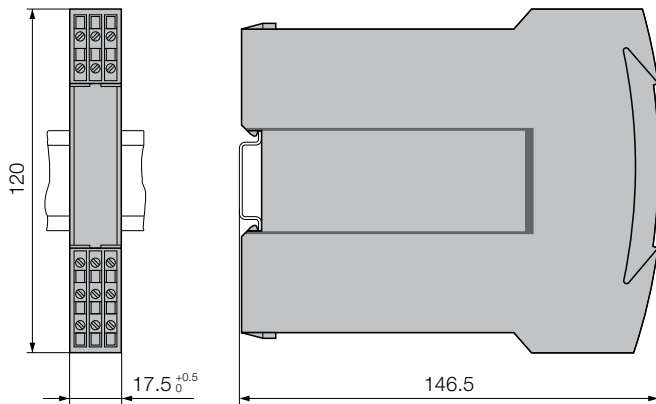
SINEAX TV 808 in housing S17 clipped onto a top-hat rail (35 × 15 mm or 35 × 7.5 mm, acc. to EN 50 022).
